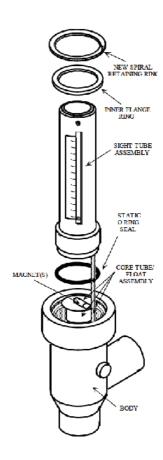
Partially exploded drawing of the MEMFIo All Metal Flow Meter
